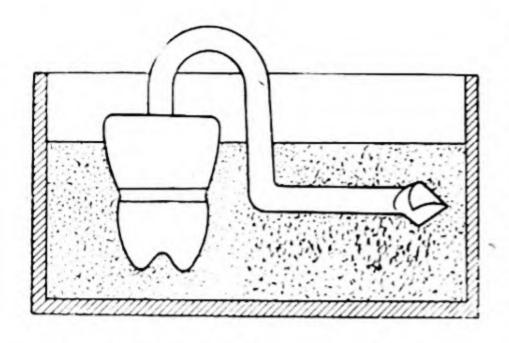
Sand box used in fitting insulators with cemented-in hooks or pins.
